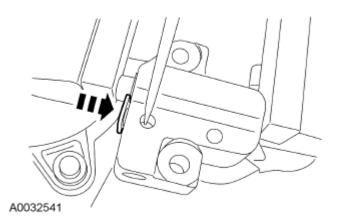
Holding Ratchet Mechanism Using Small Pick Courtesy of FORD MOTOR CO.
